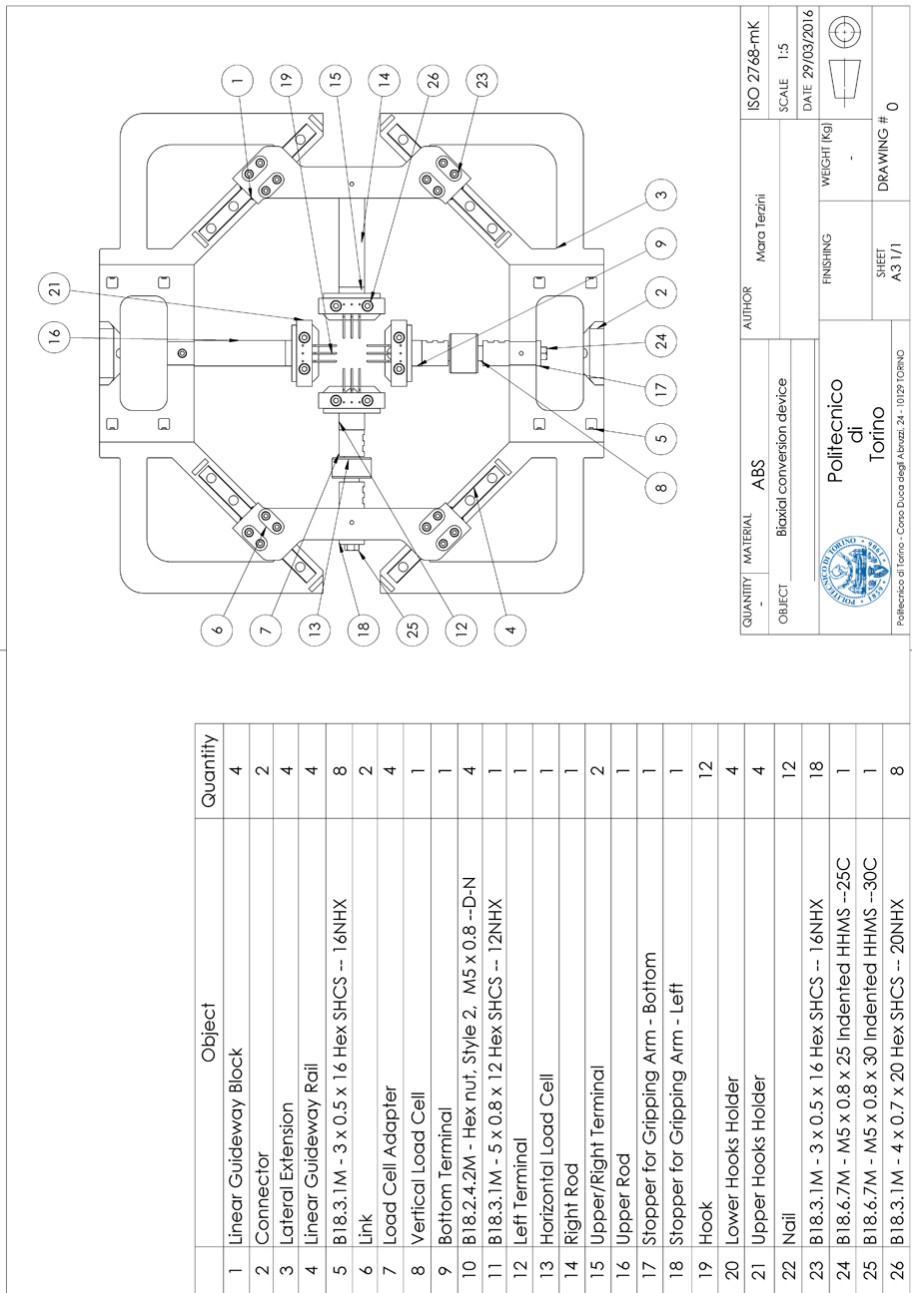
Equibiaxial conversion device assembly. The table lists all the constitutive parts.
